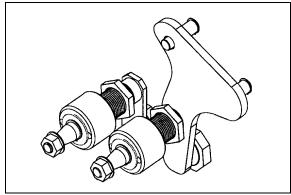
DRIVING MECHANISM (MOTOR SIDE) 23285
